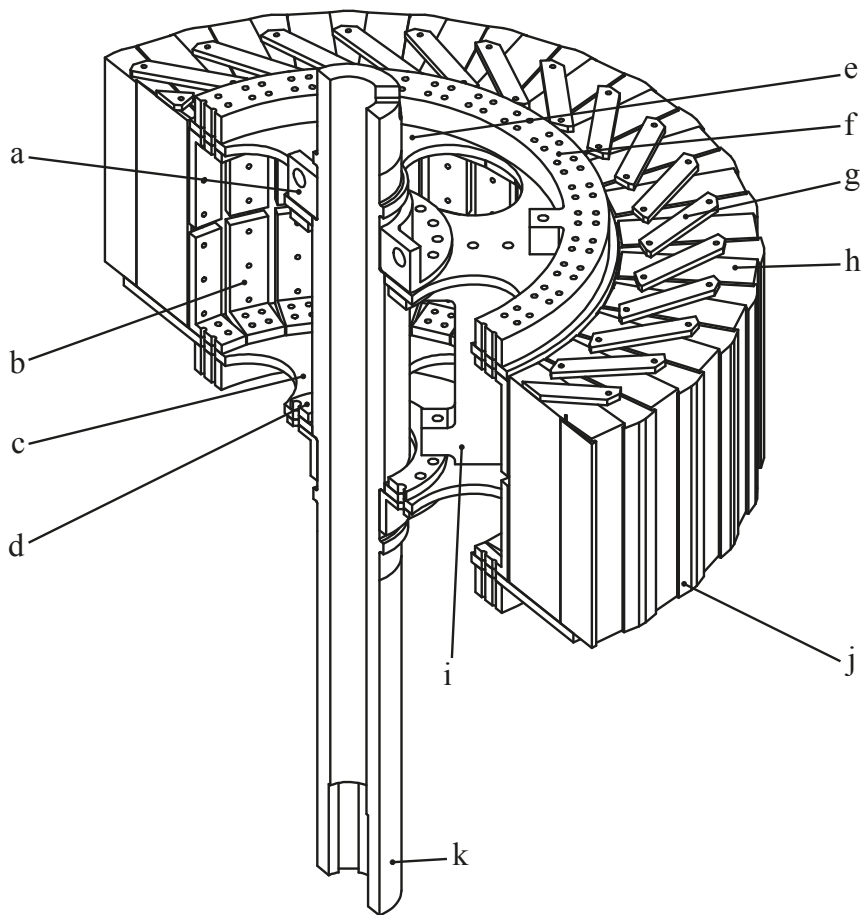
Isometric cut-away view of the ferrite PM rotor design. Half of the rotor has been removed to make the internal structure more visible. Parts indicated are: a) fastening flange, b) L-shaped pole piece holder, c) rotor bottom plate, d) small stiffening ring, e) top rotor end plate, f) large stiffening ring, g) bar for holding the magnet in place, h) permanent magnet, i) inner supports, j) pole piece, and k) shaft. All fasteners are omitted. Figure 1 from Paper I [80].
